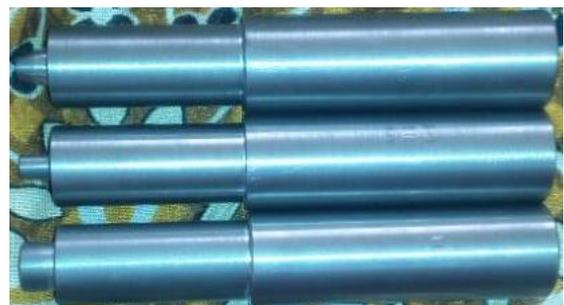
FSW tools with tapered, cylindrical & diamond shaped pins
